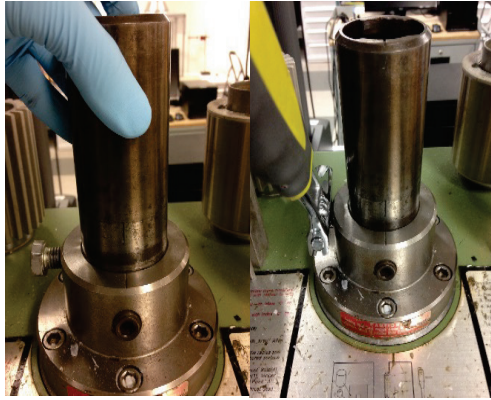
Placing and locking with cylindrical mold in pneumatic press.
